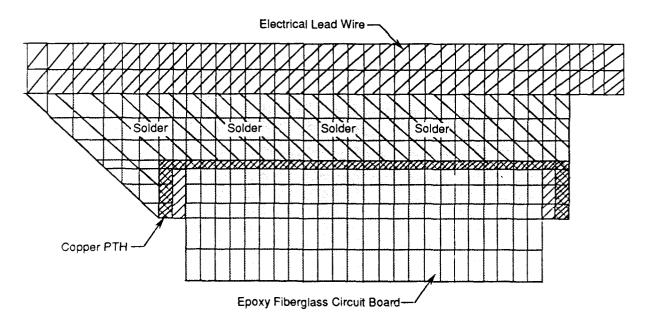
Plated Thru Hole Z-Axis Expansion
